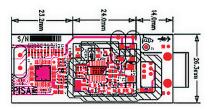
shows a reference design using the 48-pin CVxx and the CSP1040. This is a 2-layer PCB with components on topside only. The layout can be integrated into a larger PCB or built as a separate module with connectors.
